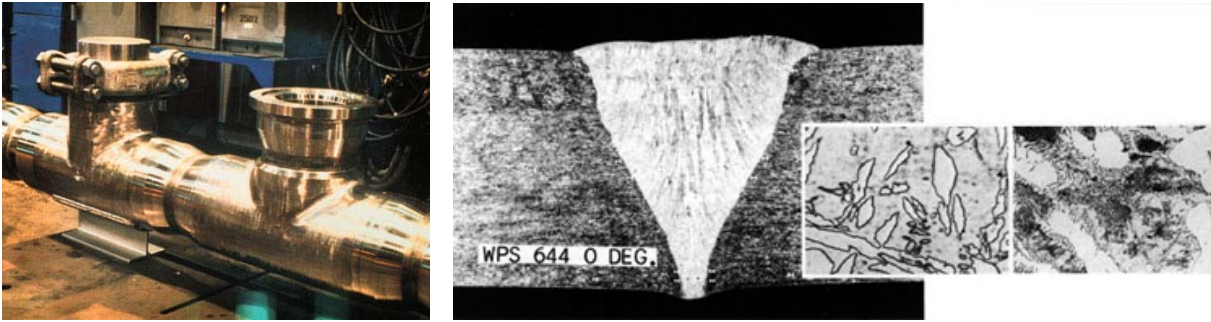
The Embla Test Header built by Cameron from forged super duplex tees using orbital GTA welding¹¹. The Weld Procedure Specification (WPS) required preparation and examination of metallographs for sigma phase and ferrite counts.
